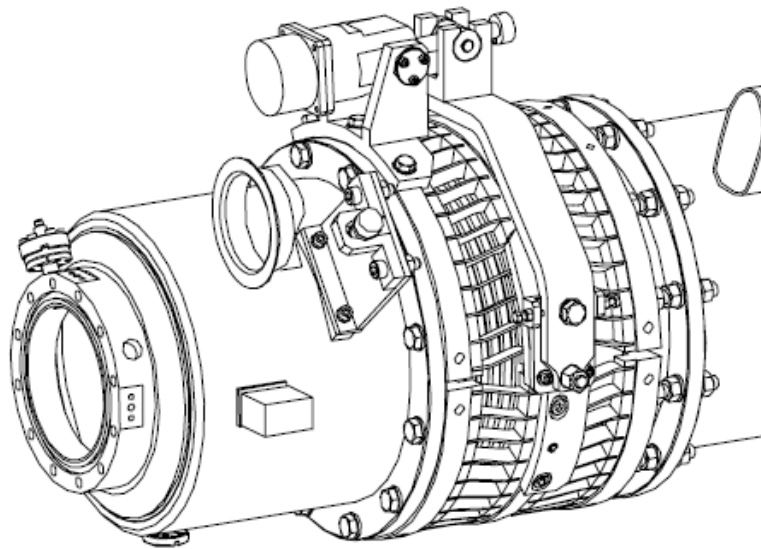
Drawing of the original Blade Tuner (SuTu tuner) assembly
